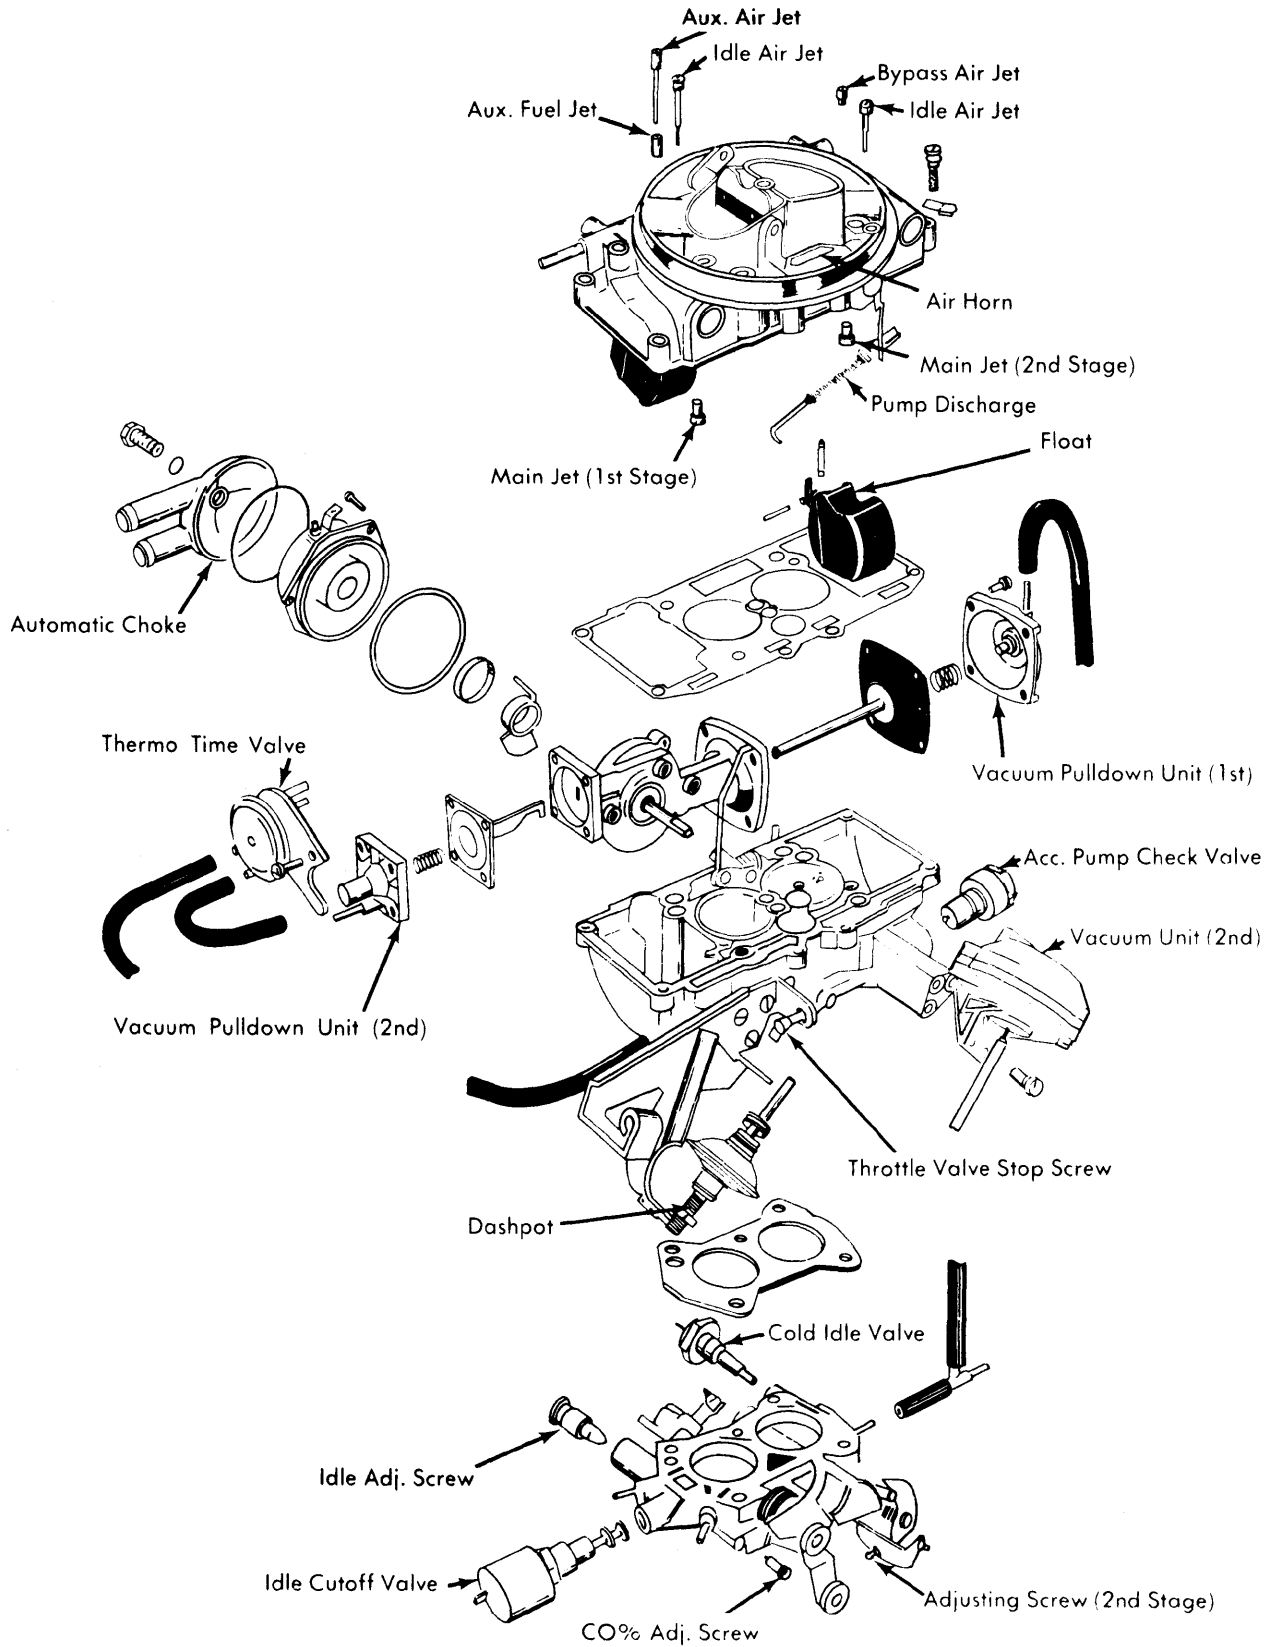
Exploded View Of Zenith 2B 2-Barrel Carburetor
